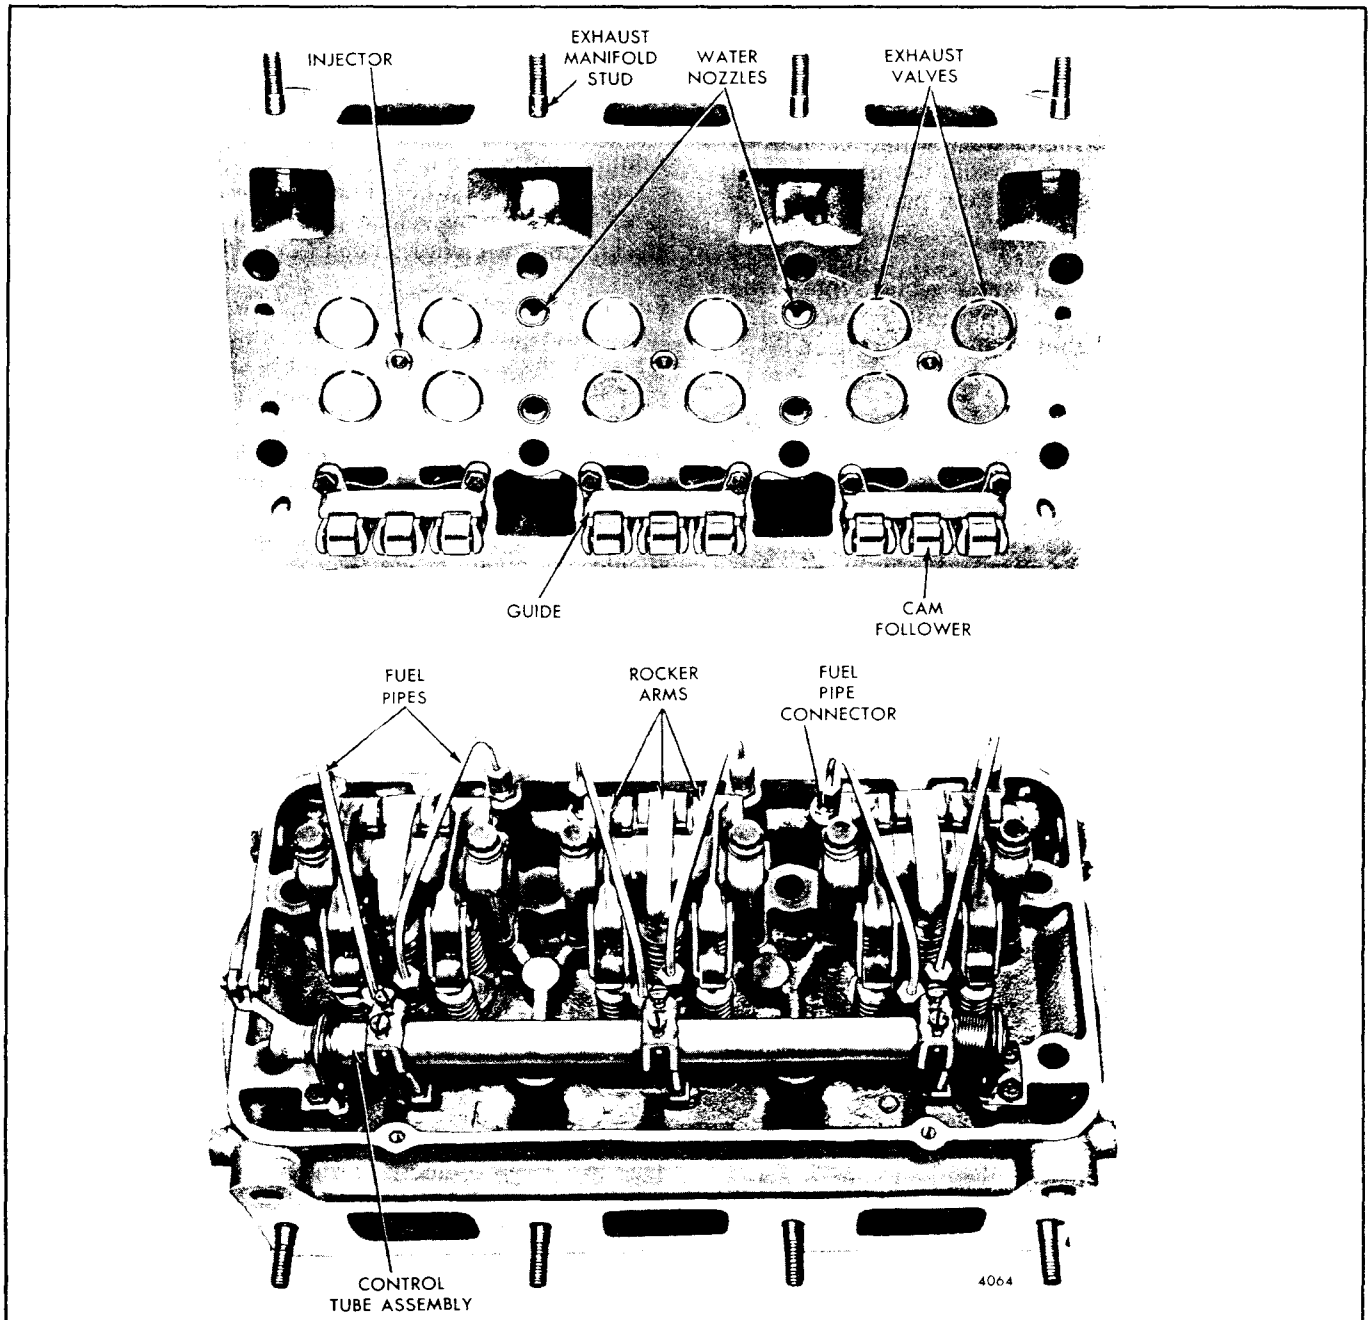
Typical Four-Valve Cylinder Head Assembly
